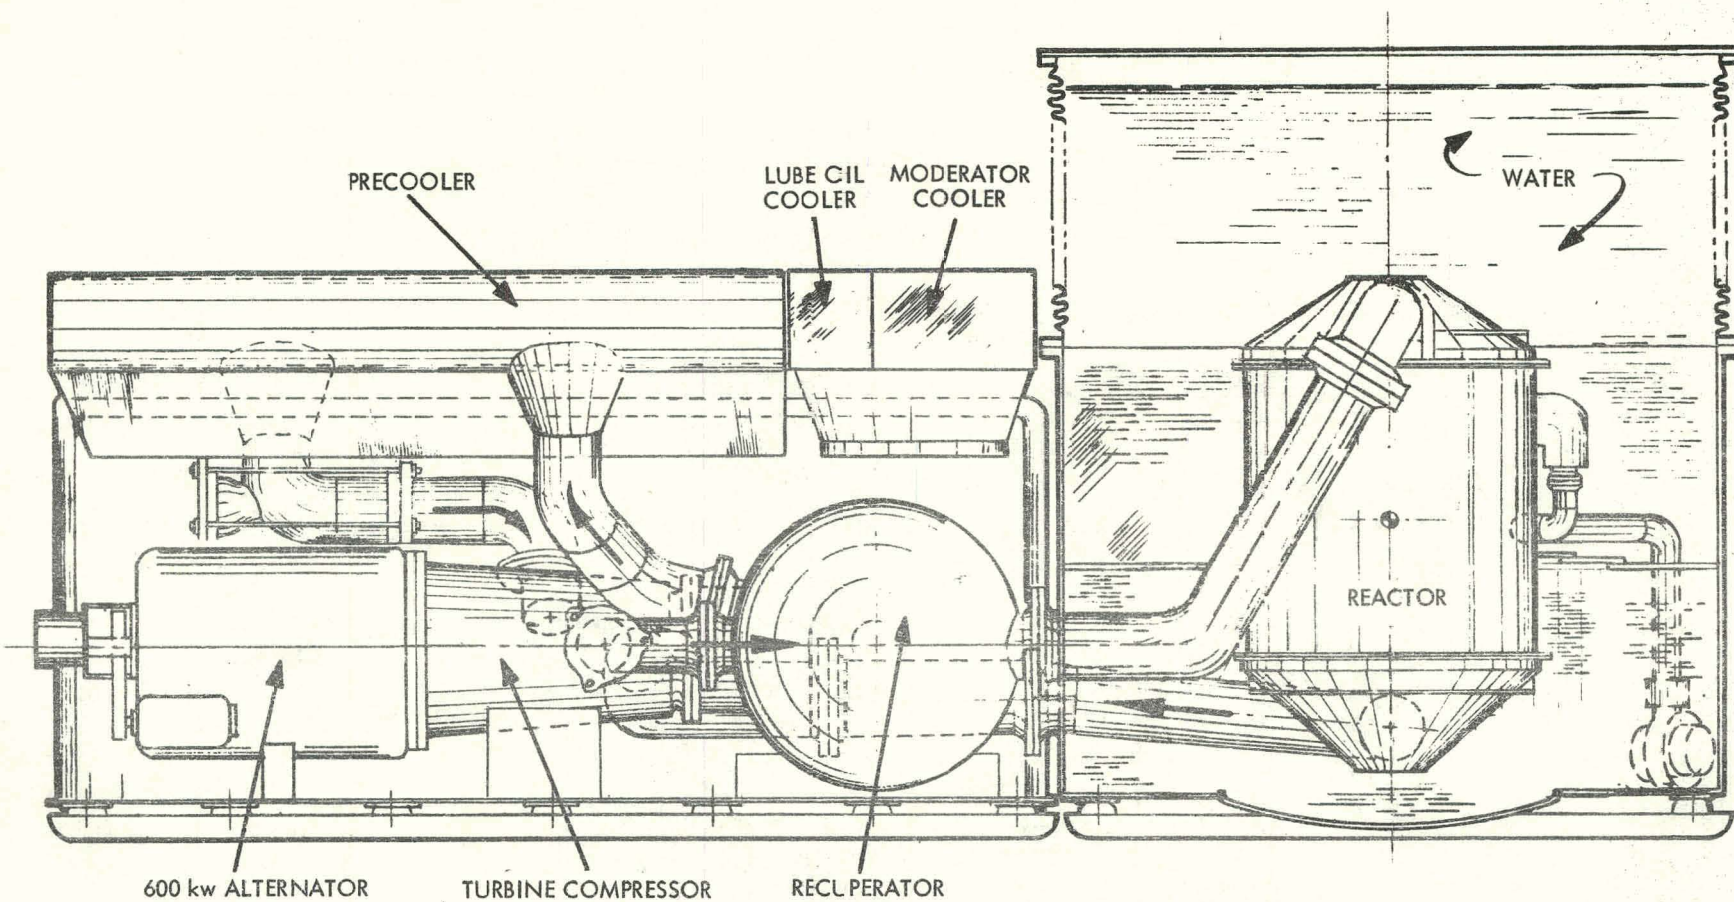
ELEVATION VIEW OF THE ML-1A POWER PLANT
